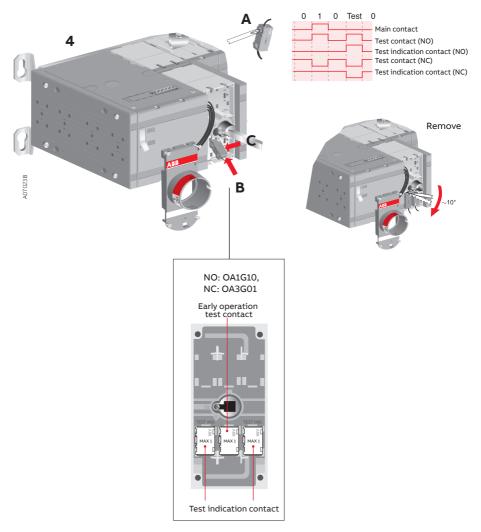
Mounting of the test auxiliary contacts, type OA_ to the switch mechanism of the motorized OTM3200-4000
